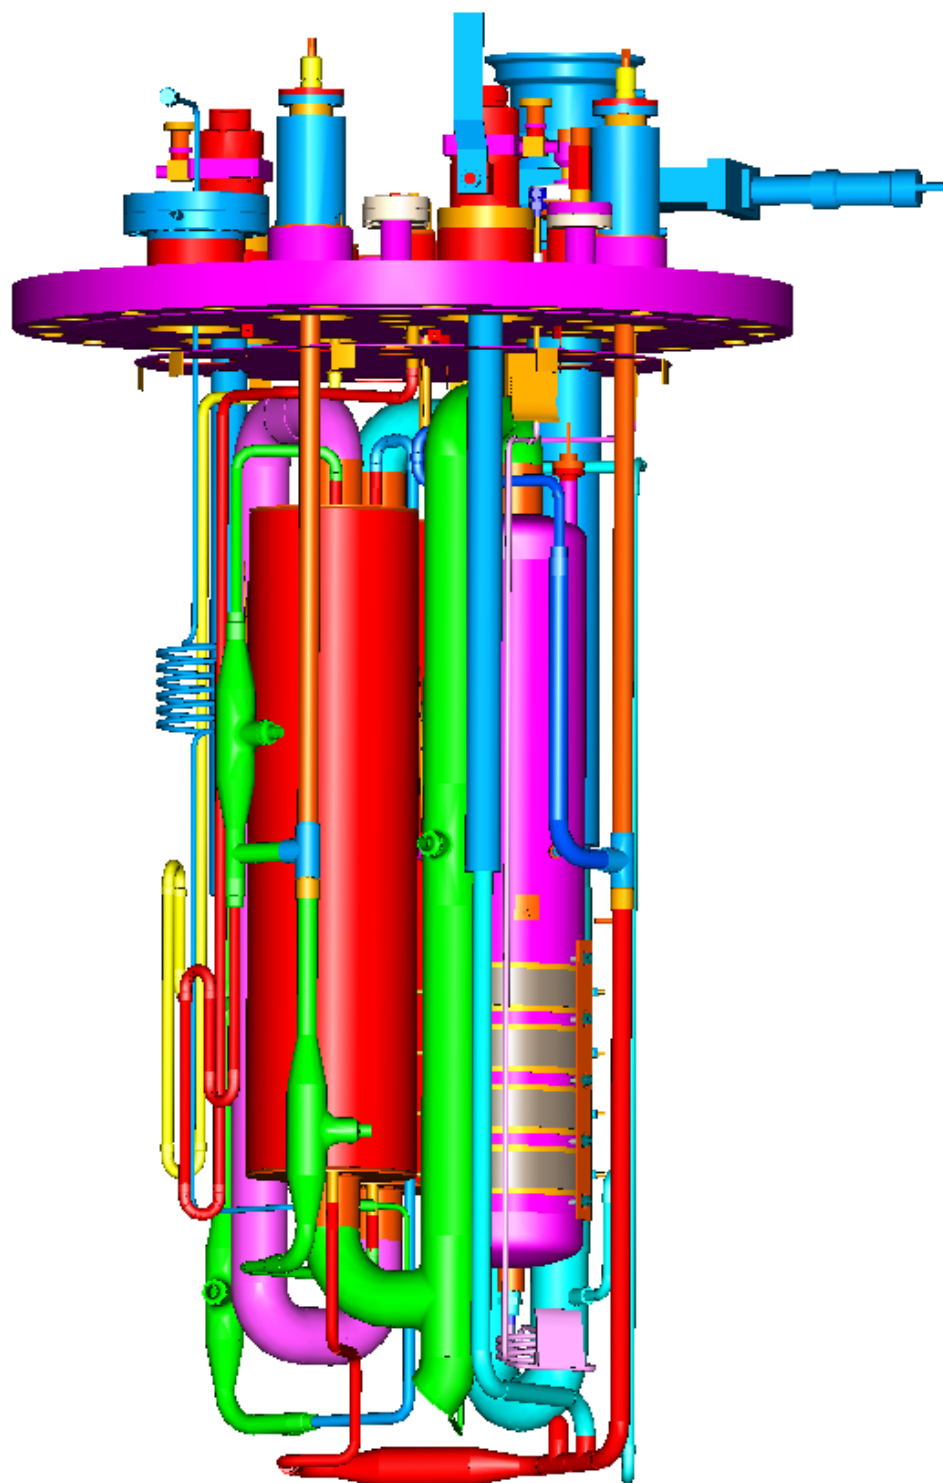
Internals of heat exchanger test apparatus, view of lower heat exchanger to left
